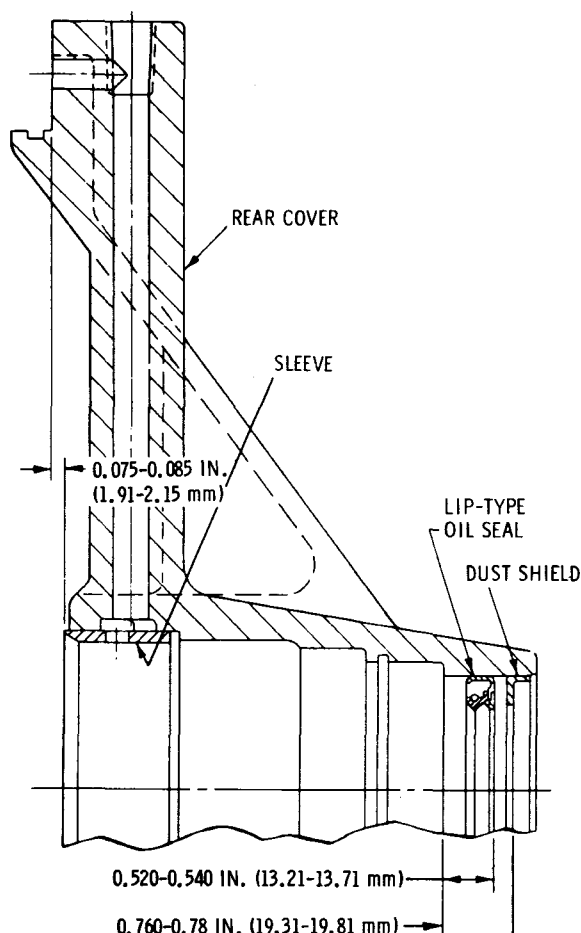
Oil and dust shield installation (TT with converter-driven PTO)
